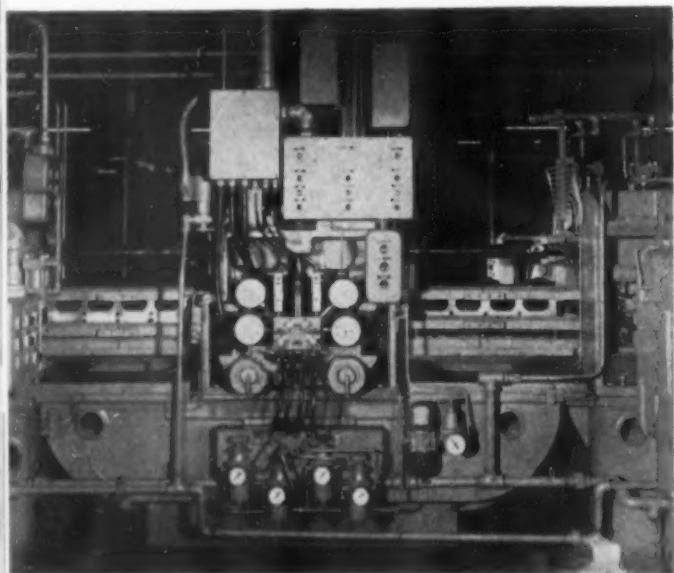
Holeway machine used in a continuous production line for mass production of an automobile engine cylinder head.
